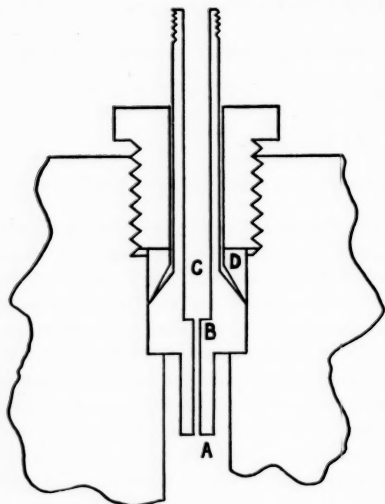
The absolute gauge; shows the cylinder of the gauge and the method of mounting it in the containing vessel.
